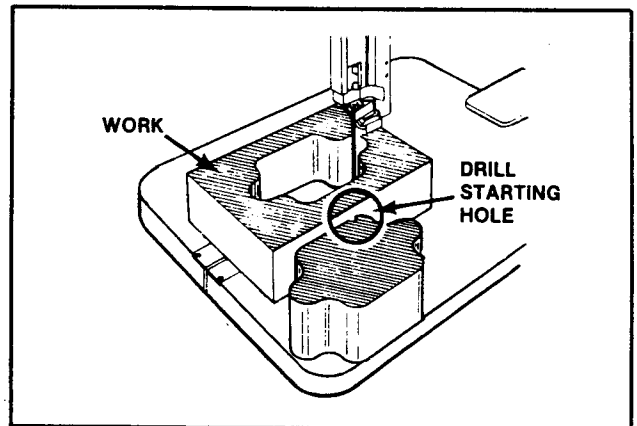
STARTING HOLE FOR SHARP CONTOUR SAWING.
